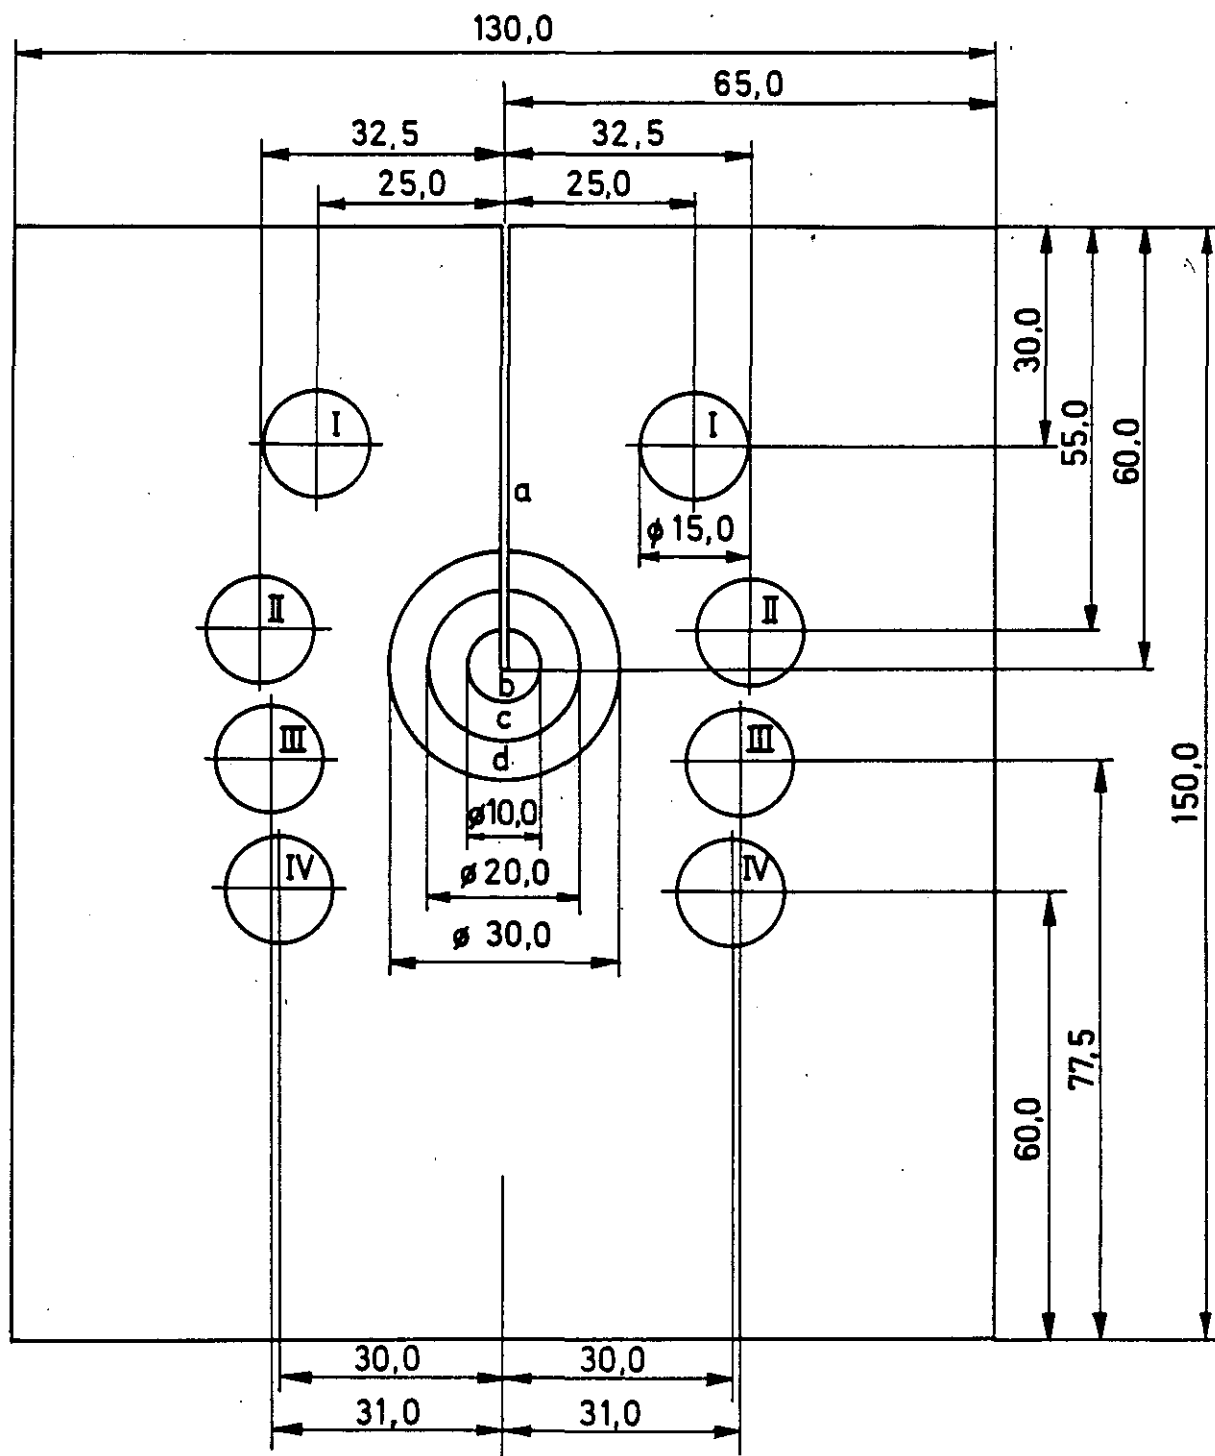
Dimensions of the Test Specimens as shown in Fig.9 Units:mm,Thickness:20mm
